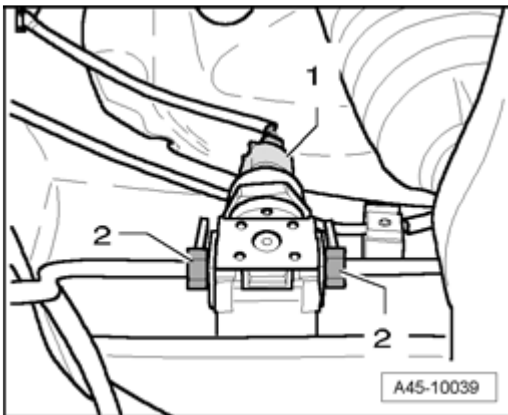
Removing Brake Lines & Disconnecting Brake Pressure Sensor 1 G201 From ACC Distributor
